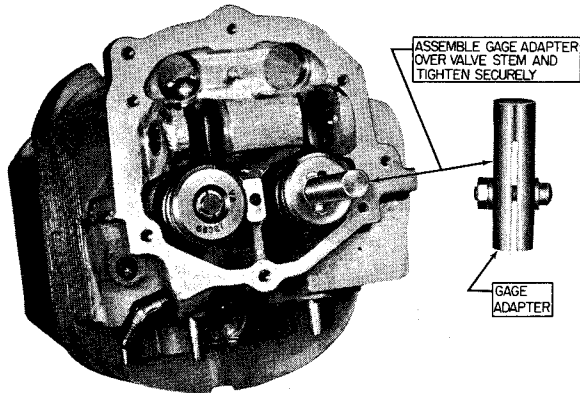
Gage Adapter Assembled on Exhaust Valve Stem
